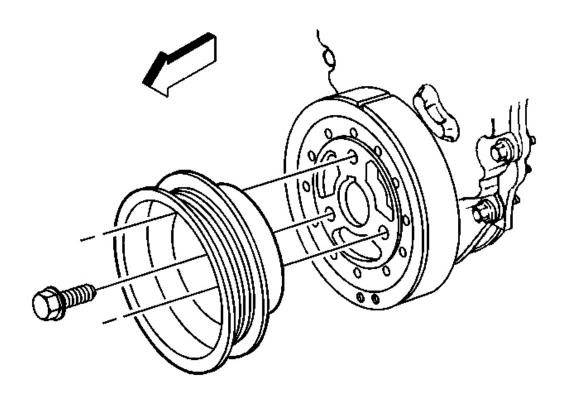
View Of Crankshaft Pulley & Bolts Courtesy of GENERAL MOTORS CORP.
